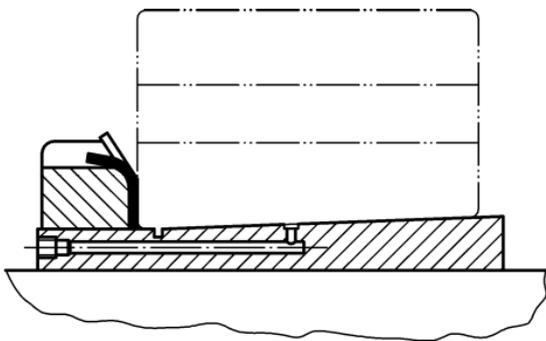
ADAPTER SLEEVE WITH SUPPLY DUCT FOR OIL INJECTION; SUFFIX: H
